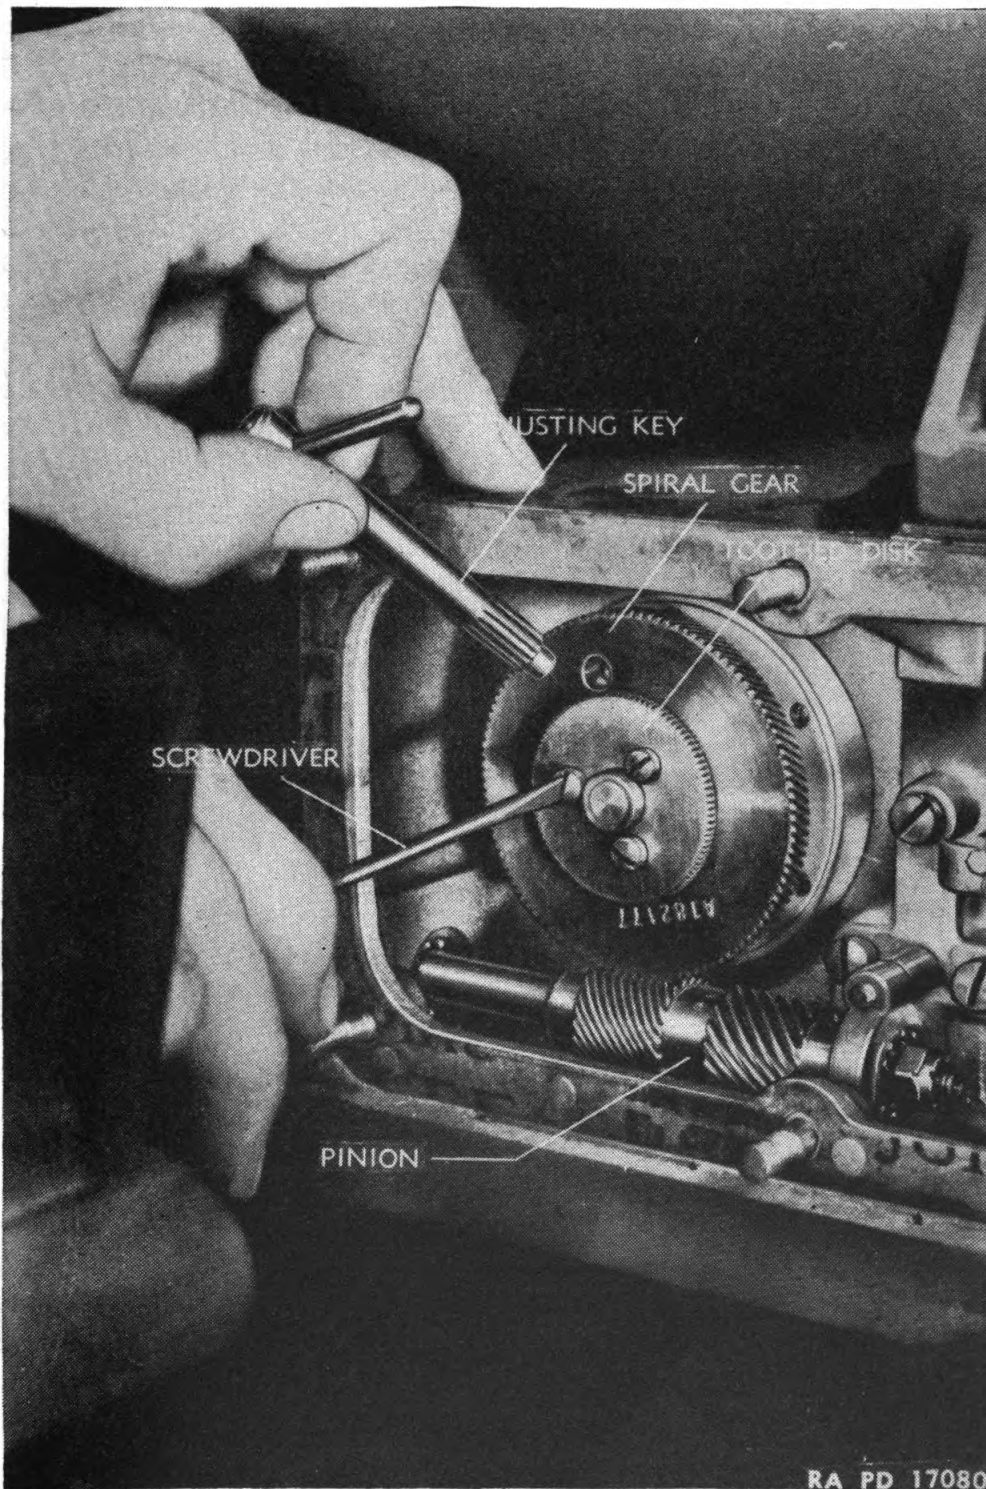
Adjustment of resetter transmitter spiral gear.
